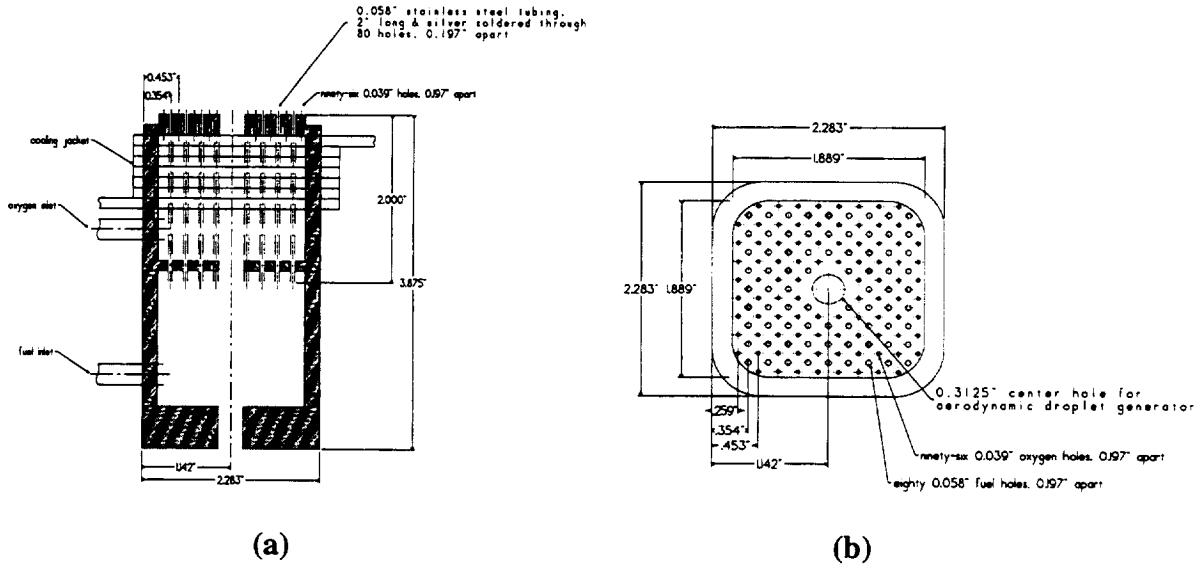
(a) Cutaway view of the flashback-resistant burner used in Experimental Setup #4 and (b) top view showing the fuel and oxidizer grid pattern.
